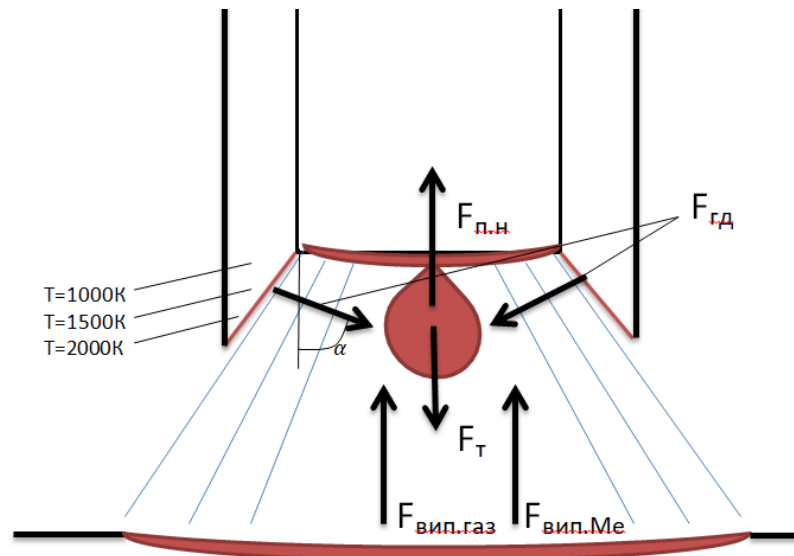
Balance of forces acting on a drop during MMA welding
